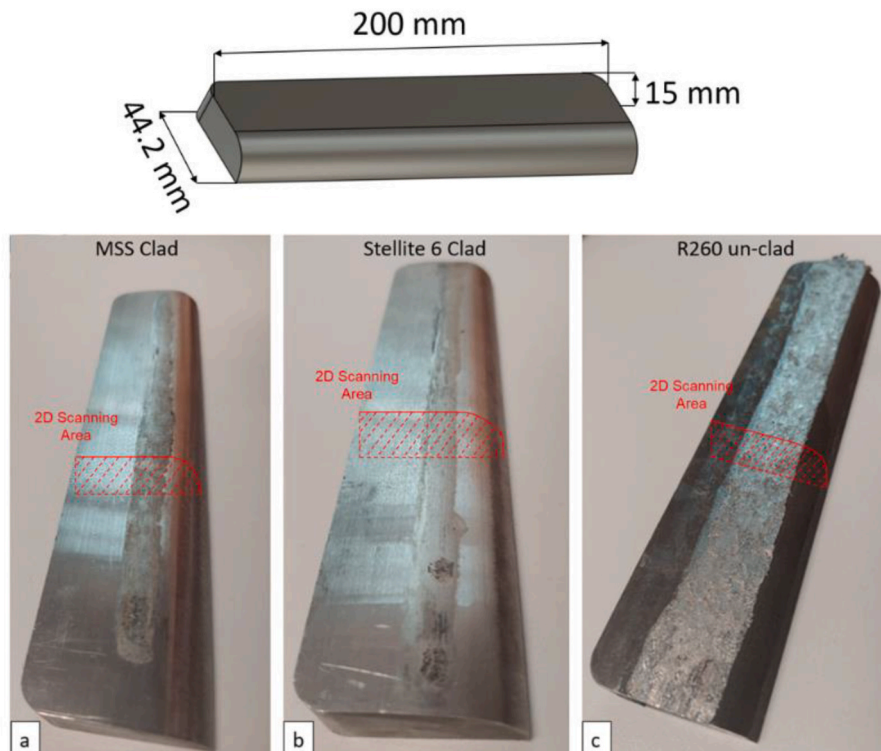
Full scale test pockets after tests: a) MSS Clad pocket specimen b) Stellite 6 pocket specimen c) R260 un-clad pocket specimen.
